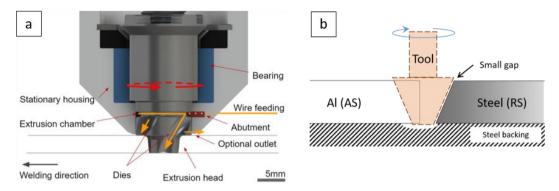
(a) The HYB PinPoint extruder is built up around a rotating pin provided with an extrusion head with a set of moving dies through which the aluminum is allowed to flow; (b) Schematic illustration of the rotating pin and its location in the weld groove during HYB butt welding of aluminum to steel. Note the difference in shape of the groove on the aluminum side and the steel side.
